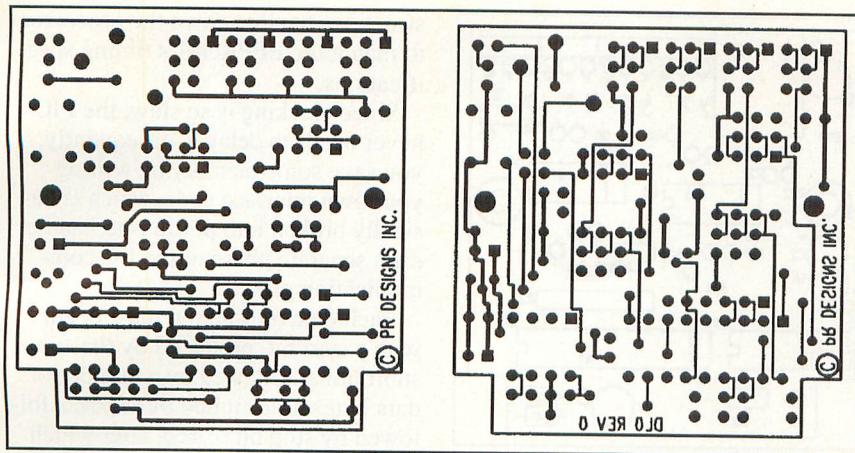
Actual-size etching-and-drilling guides for component (left) and solder (right) sides of Data Logger printed-circuit board.
